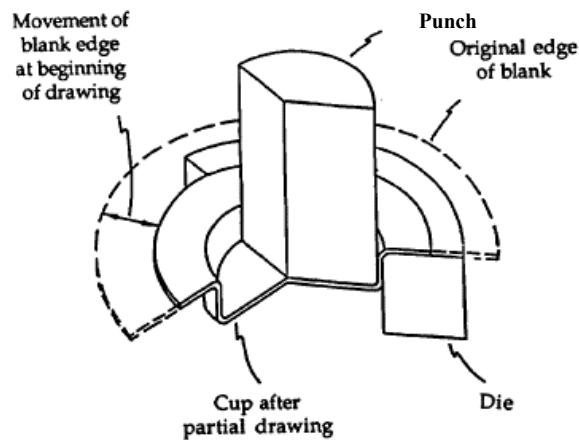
Deep drawing operation figured in 3D by sectioning.
